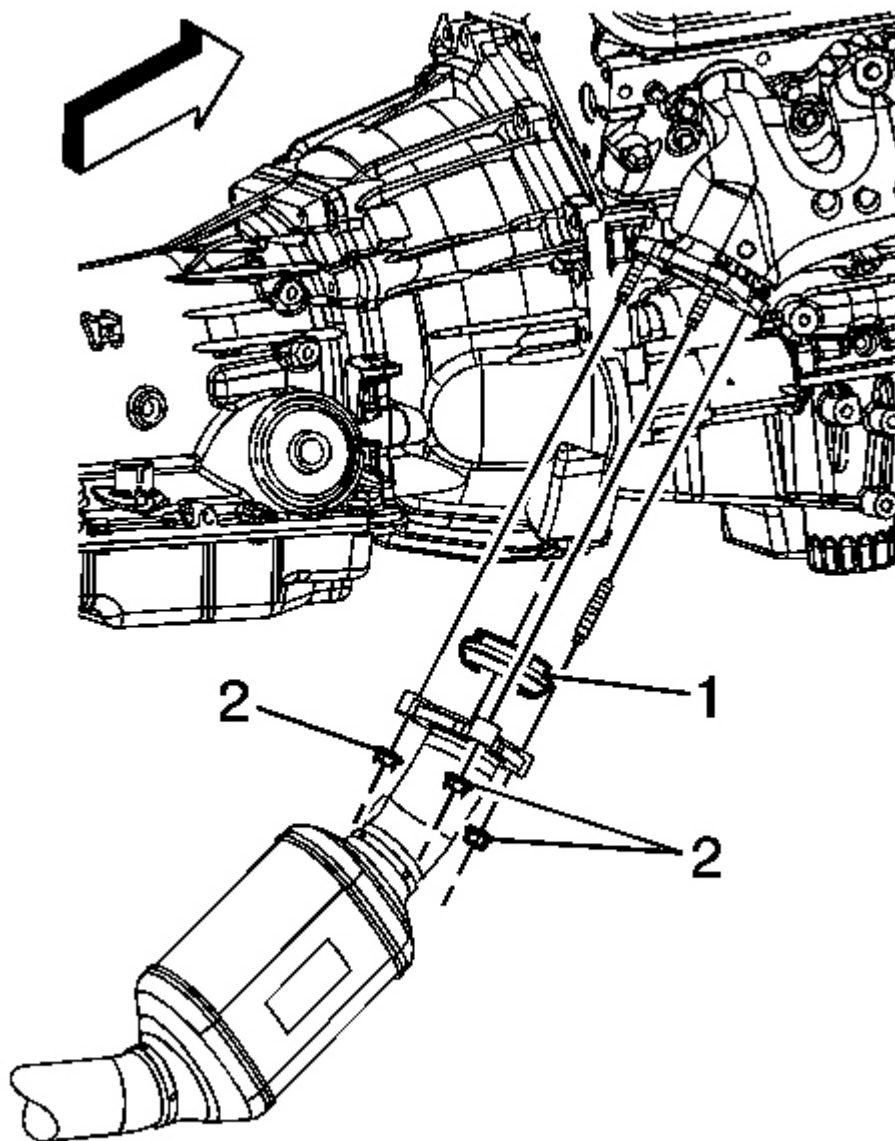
View Of Exhaust Manifold, Catalytic Converter, Sealing Ring & Nuts
